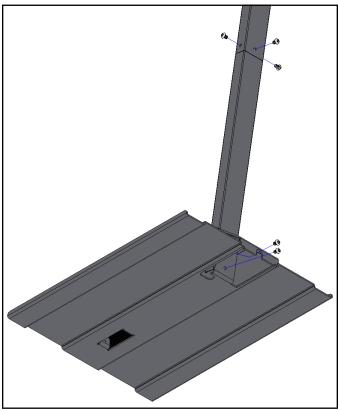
Assembling the pedestal and base plate using the 5 socket head screws
